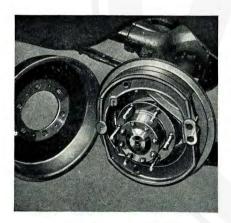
Rear Wheel Brake with Brake Drum removed.
